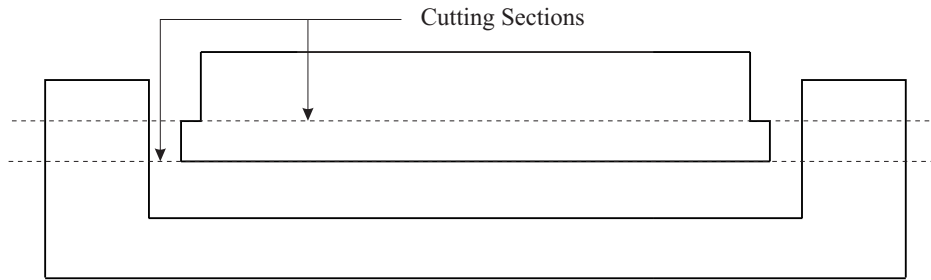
Sections cut in the bearing to generate ring and disk model
